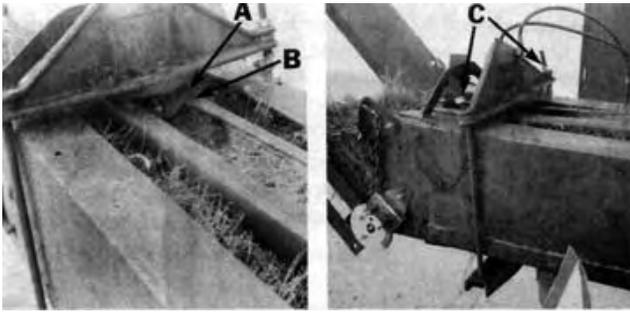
Bent Hydraulic Ram Linkages: (A) Cross Piece, (B) Tension Rail, (C) Tension Rod.
